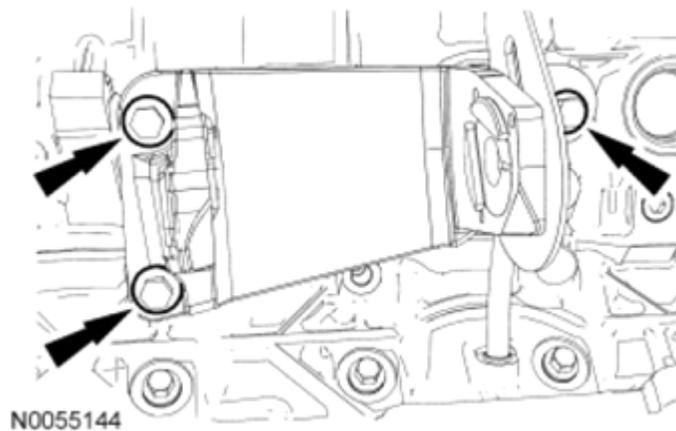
Locating Bolts And Engine Support Insulator-To-Cylinder Block Bracket LH
